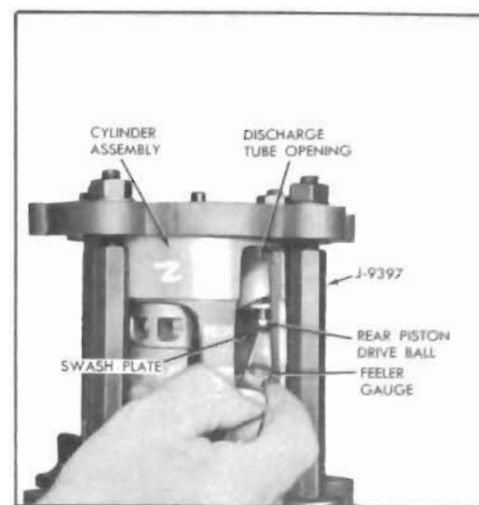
Checking Clearance Between Rear Piston Drive Ball and Swashplate
